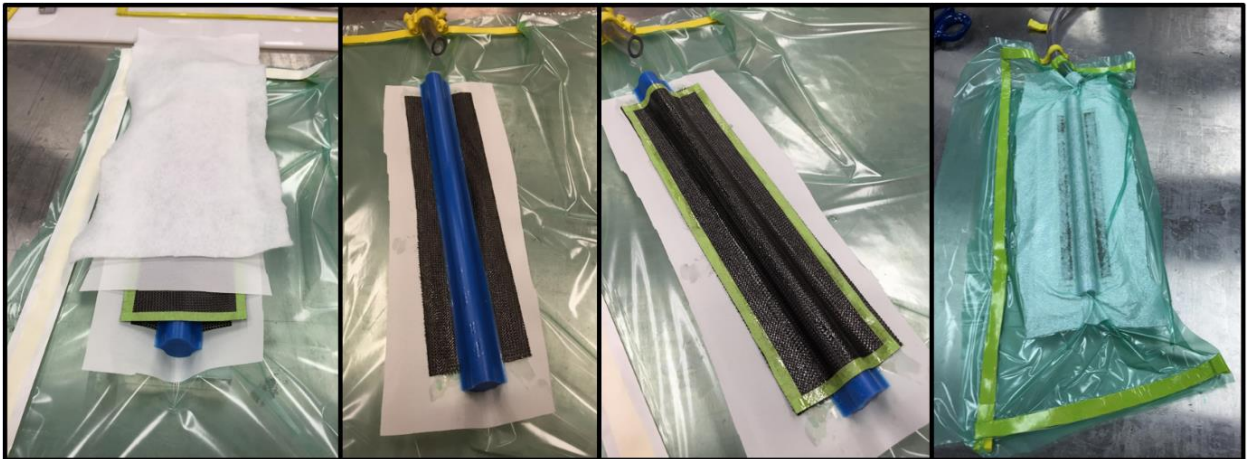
Internal Silicone Plug for Whole Boom Fabrication
